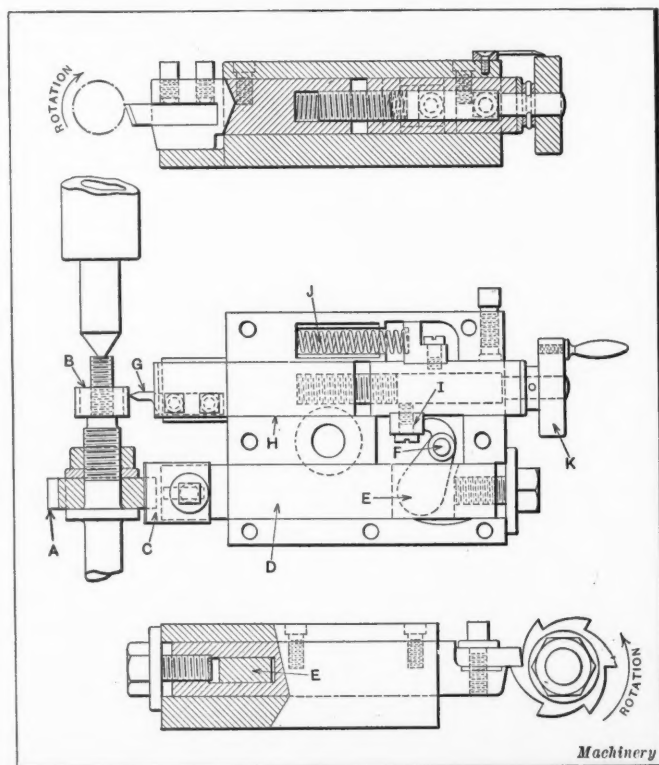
Attachment designed for relieving Cutters of Type shown in Fig. 1
